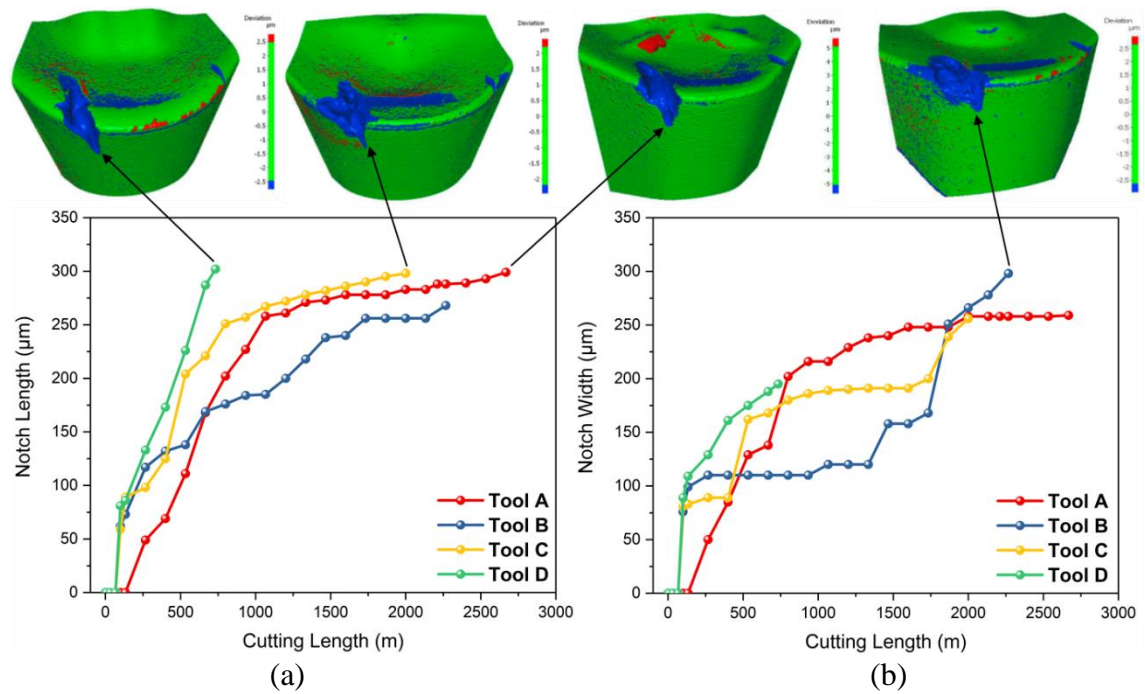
Tool notch wear progression with machining length: (a) notch length and (b) notch width
